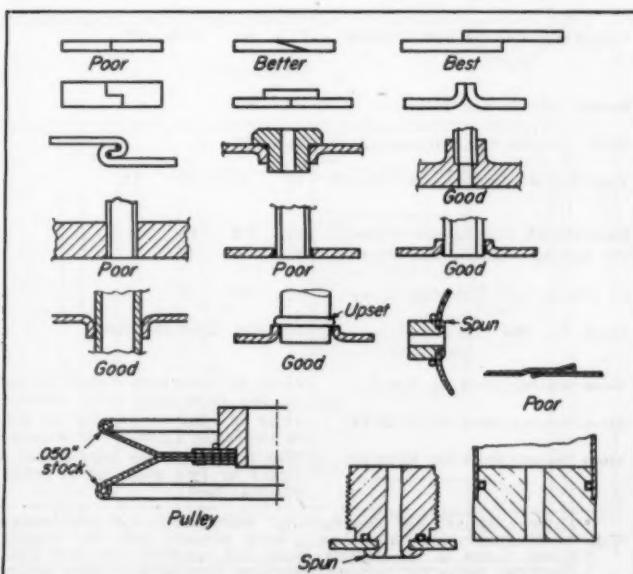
Typical lap joints utilized in designing brazed assemblies, below. Typical joints with aluminum brazing sheet, before and after brazing, are shown above
